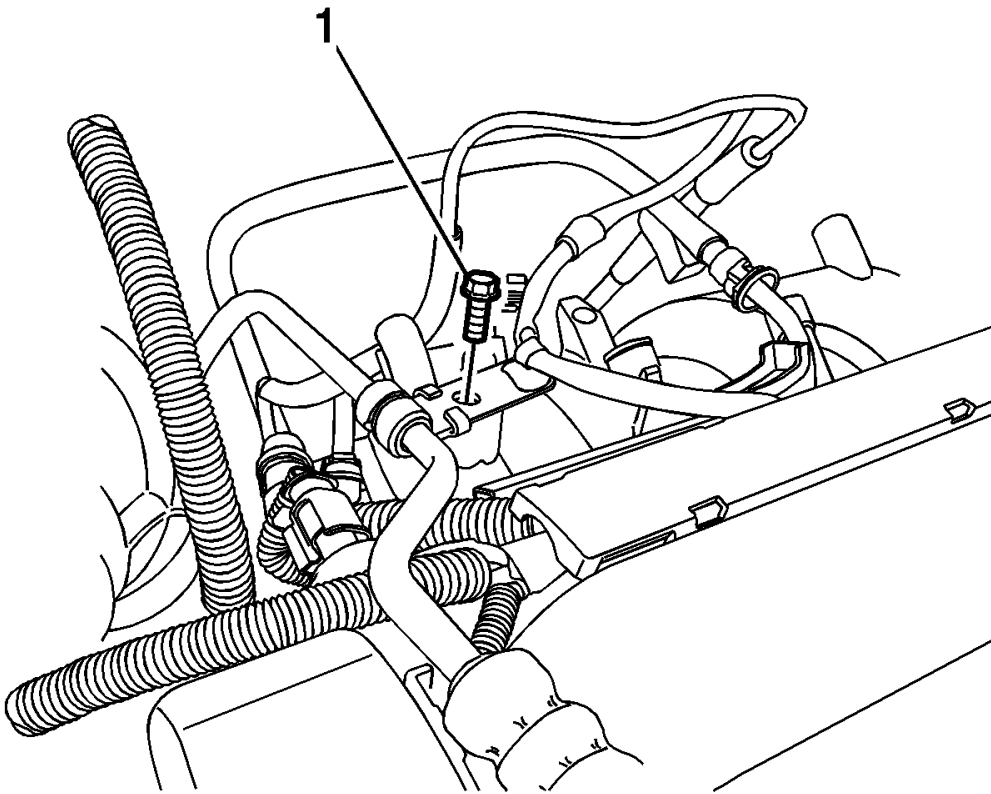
Power Steering Pump Pressure Pipe Clamp Bolt
